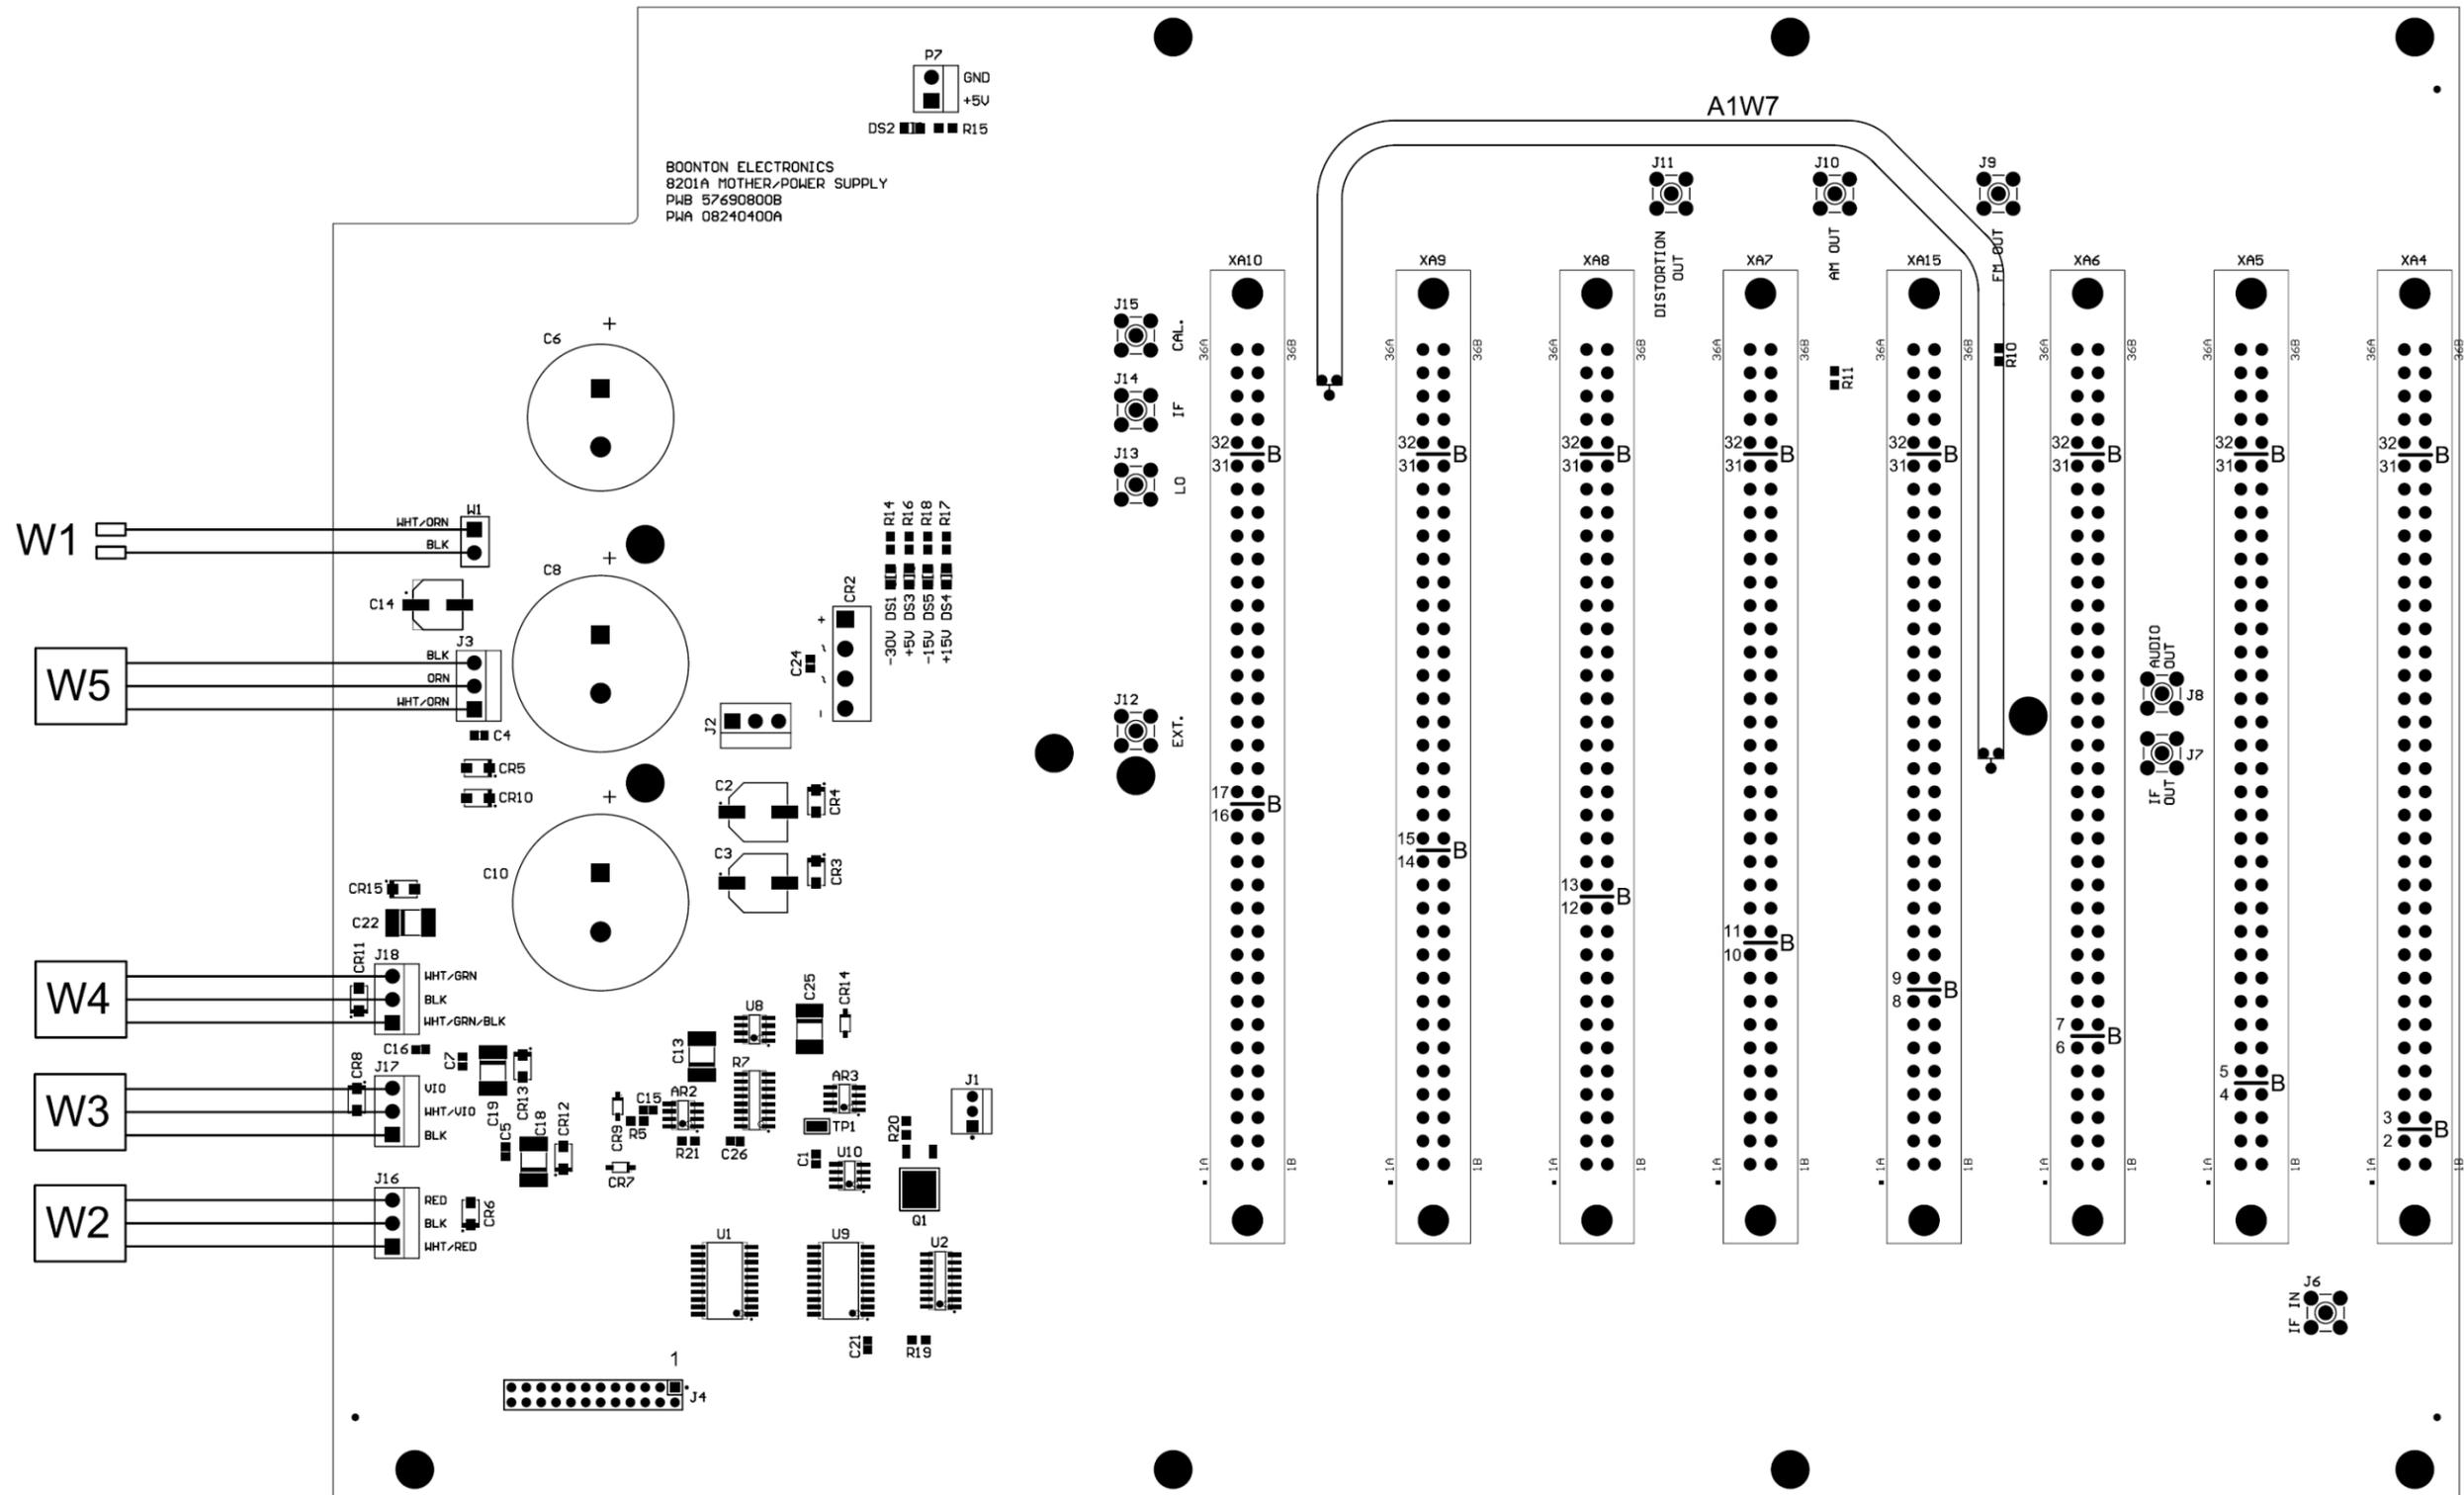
Mother/Power Supply Board A1, Parts Location.
